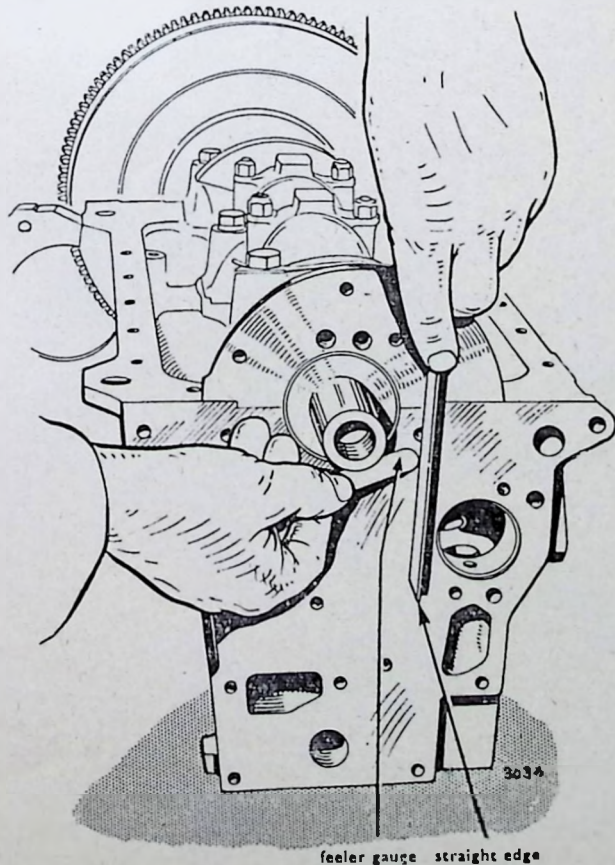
Checking the front main bearing cap alignment with a straight-edge and .0015 feeler. (O.H.V. engine).
